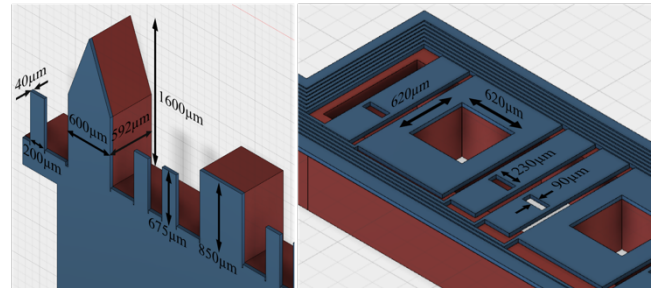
CAD model of chips, detailing dimensions of the pillars (left) and the holes on the hub chip (right)
